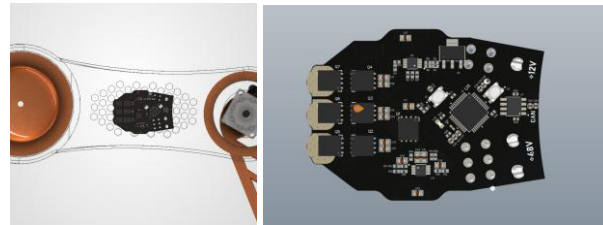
FluxCruiser motor driver board Wireframe and back view.
